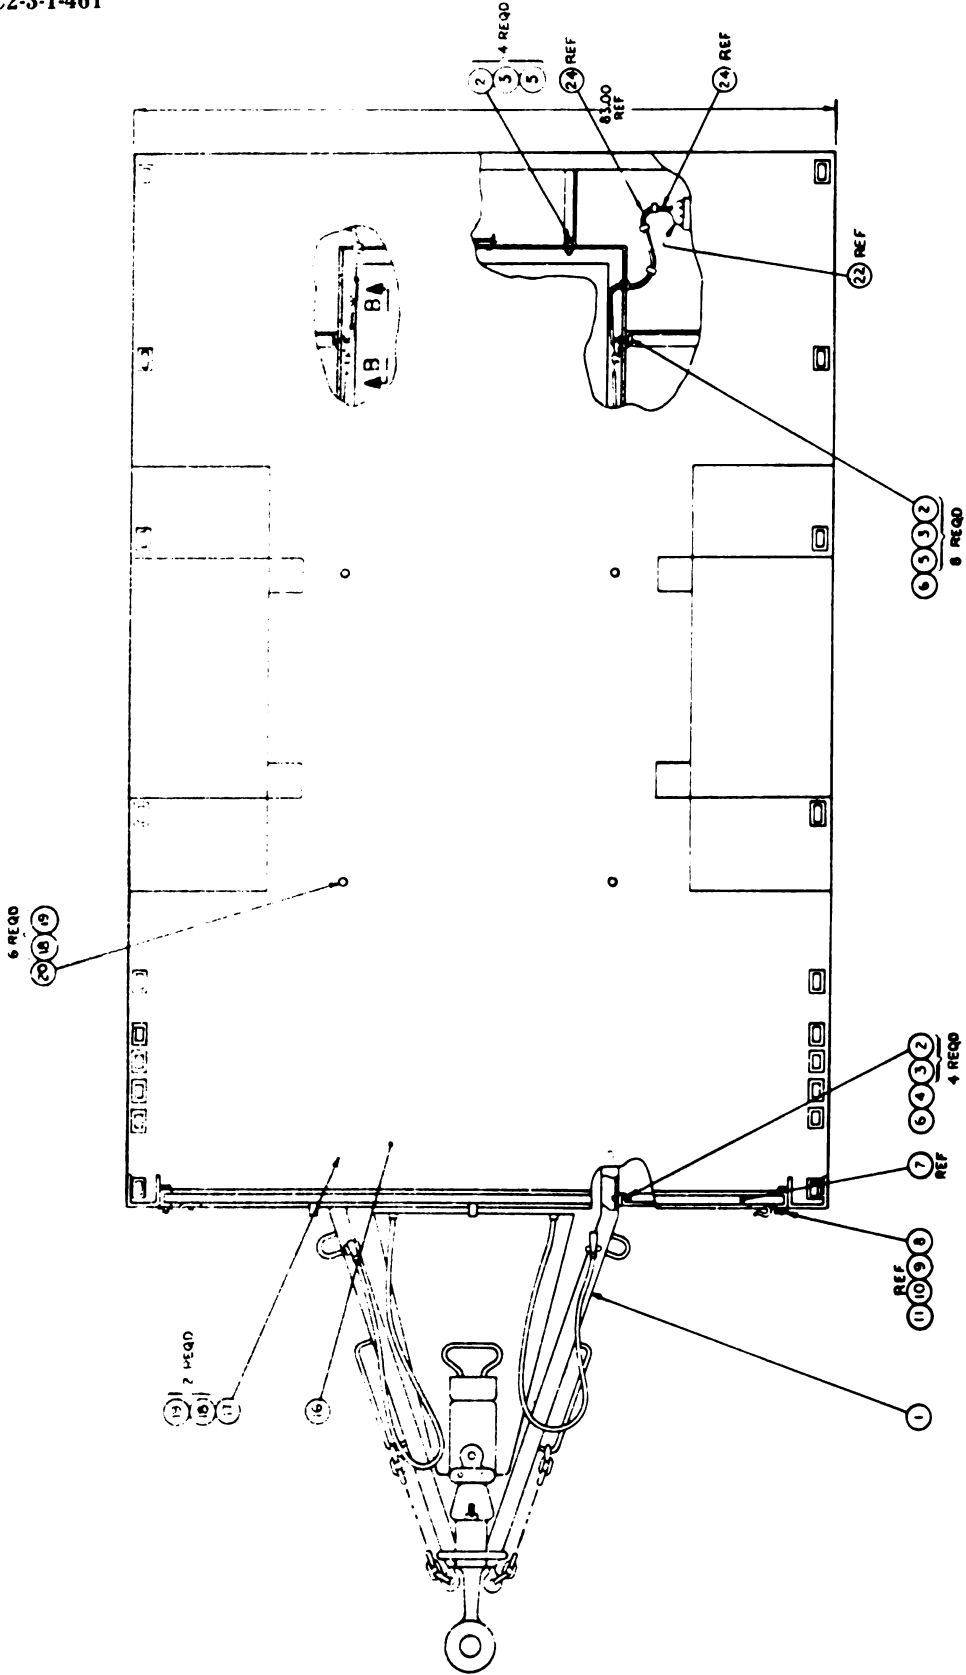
Trailer, Flatbed Assembly (Sheet 1 of 2)
